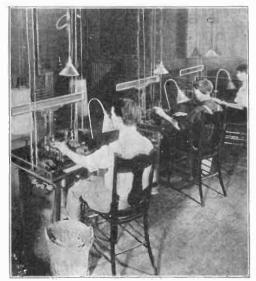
TESTING NEW-MADE CABLE-IN THE LABORATORY
